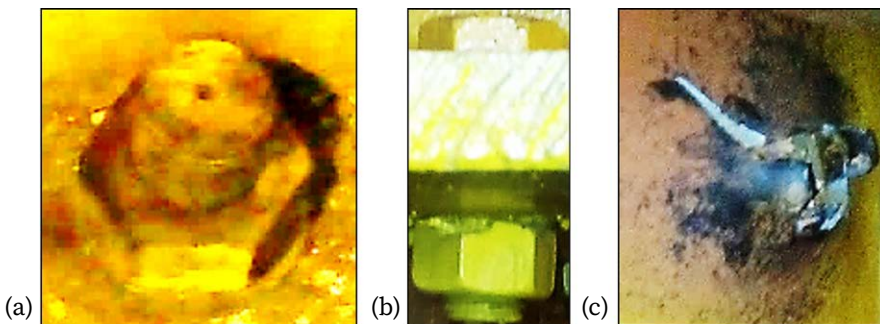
Deformed parts of a hydraulic press: (a) anchor bolt M36; (b) top beams fastening bolts M24; (c) hole in the front plate ( $h = 14$  mm) of axial thrust
